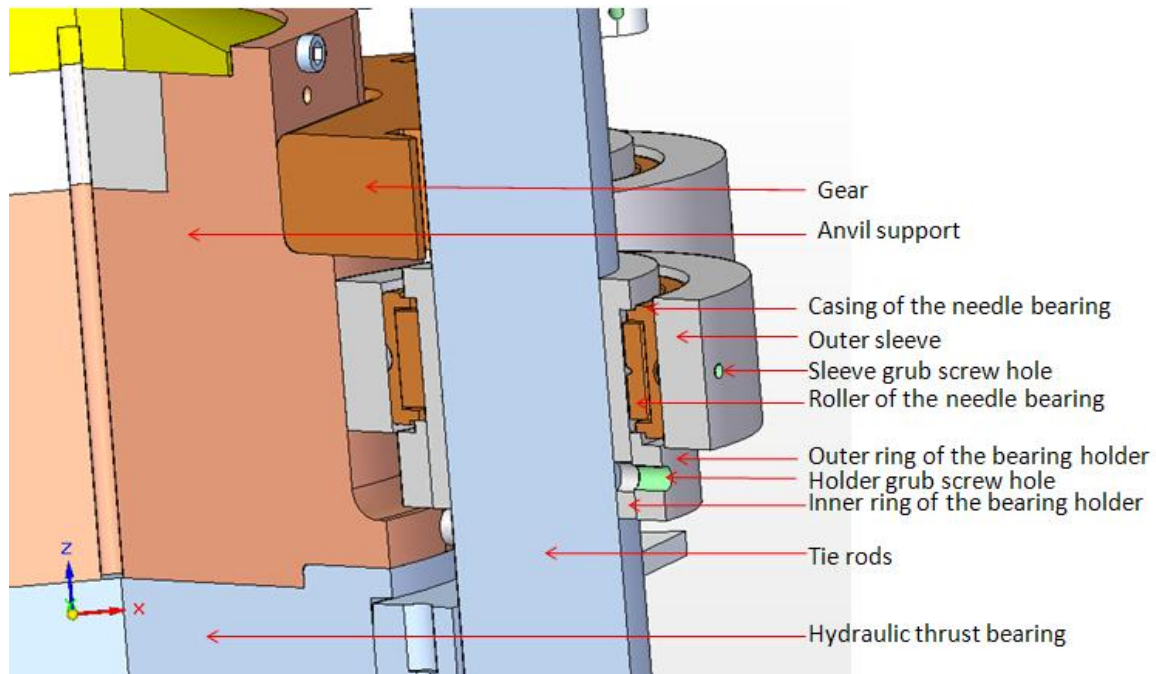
The assembly of the needle bearing with a sleeve outside as an enhancement. The assembly shown here is used on the bottom side in the 2<sup>nd</sup> version of the RV4, while a similar but smaller assembly is used on the top side. The sleeve as well as the bearing holder that supports the needle bearing on the tie rod is made of stainless steel. In the 1<sup>st</sup> version of the RV4, there is no sleeve outside the needle bearing.
